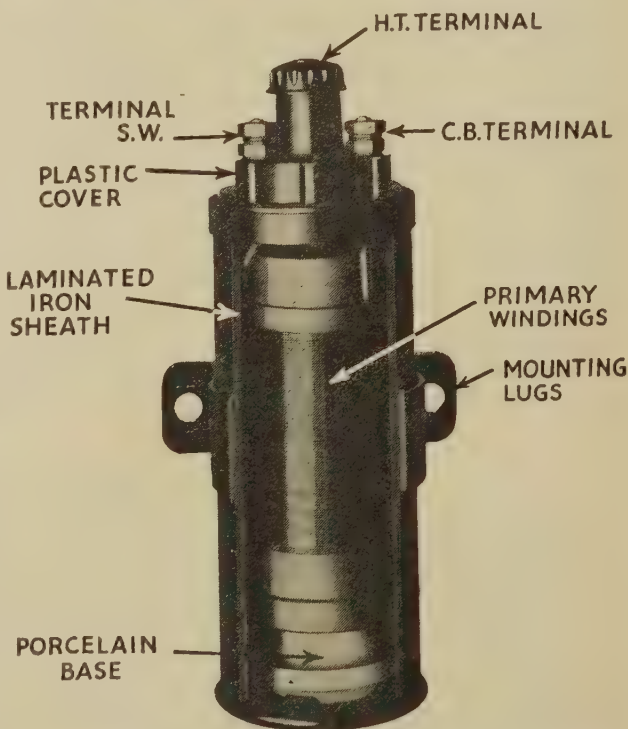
The Lucas H.T. Coil with part of Casing removed to show the construction.
